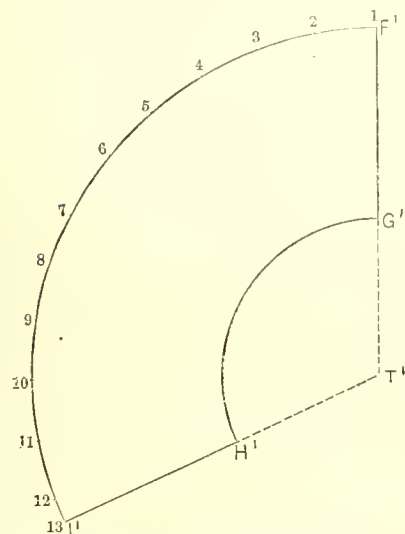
Pattern of Lower Section. Three-Piece Elbow in Flaring Pipe, the Middle Section of which is Straight.
